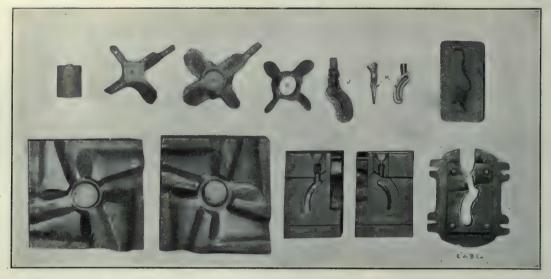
Drop-forgings and dies for propeller wheel and turbine nozzle.
